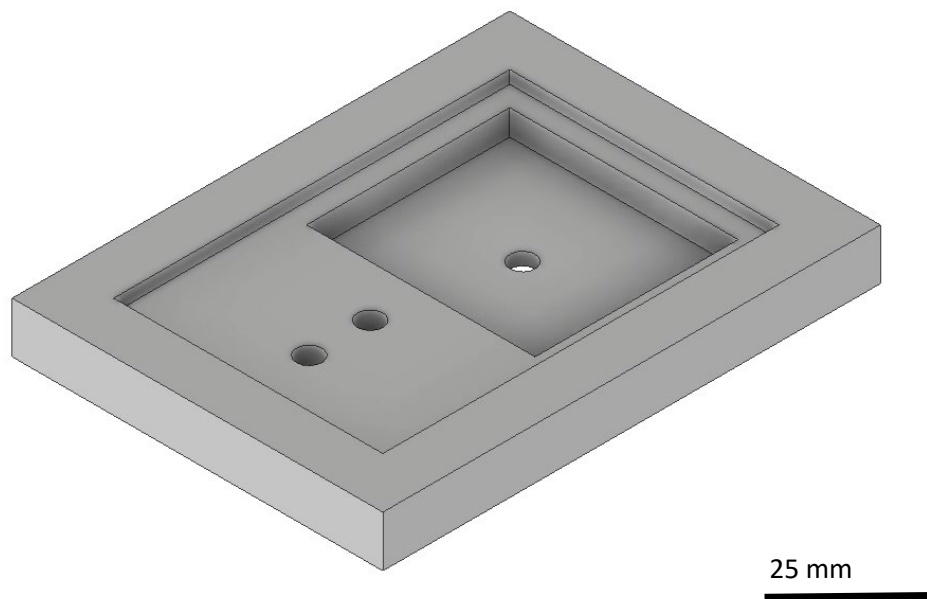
Schematic diagram showing the first iteration of the casting process using a milled aluminium block. The deep recessed area could house the structured face of the mould, either through patterned aluminium plates, or using a photoresist and silicon mould. The small ridge around the edge supported a glass slide, ensuring both faces of the PDMS stamp were parallel.
